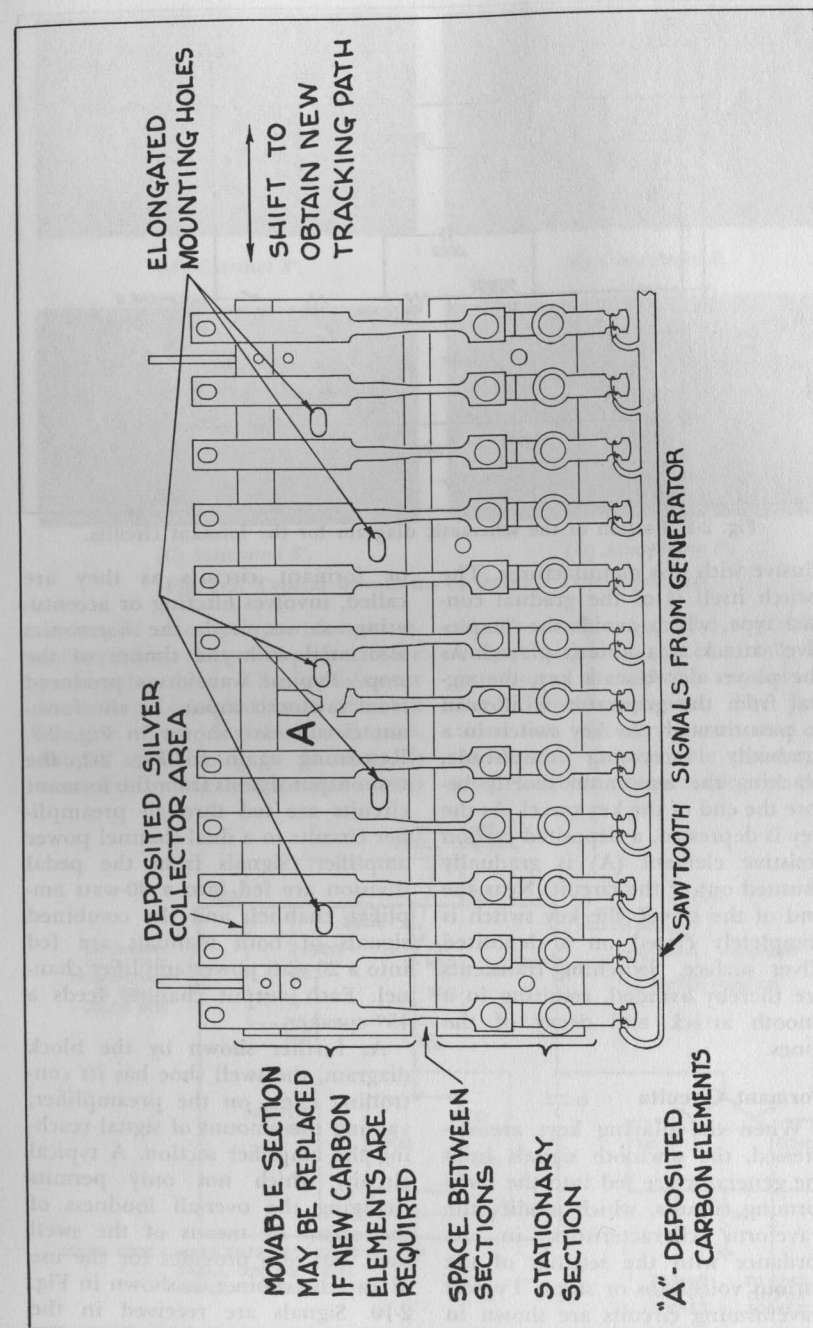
Details of the Baldwin gradual contact key-switch arrangement.
